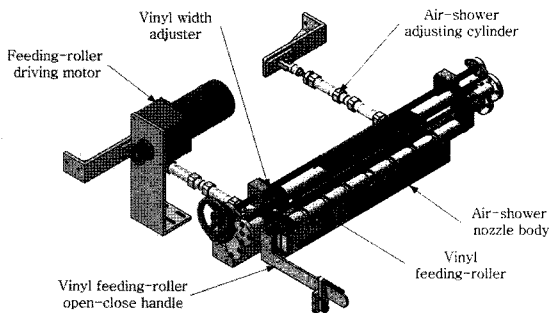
Composition and CAD model of package-bag feeding and air-shower mechanism
